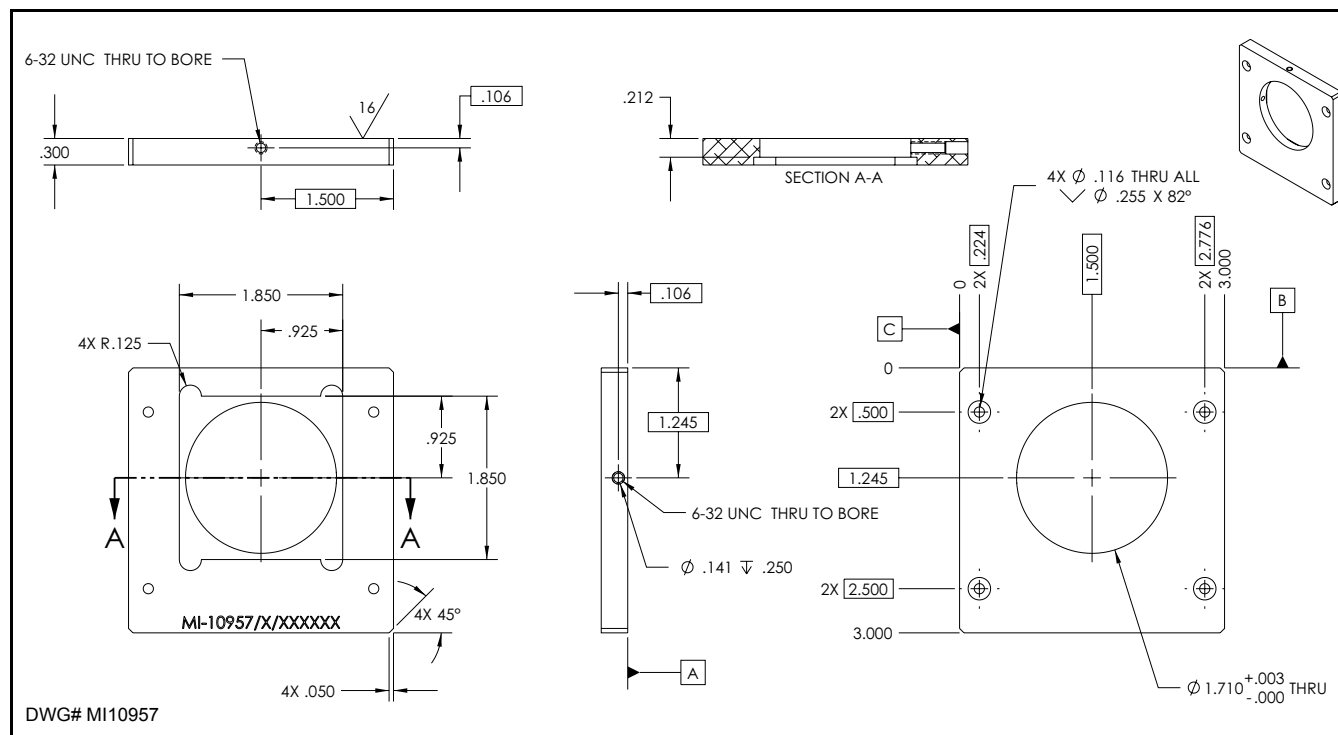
Mounting Assembly for the 35 mm Aperture Enclosure
